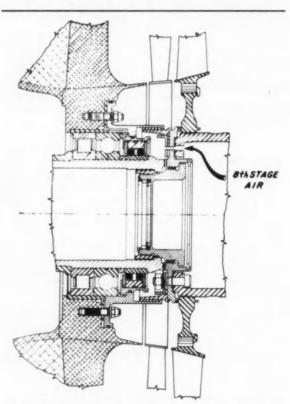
Large-size face contact-type seal for turboprop with constant pressure difference across seal
